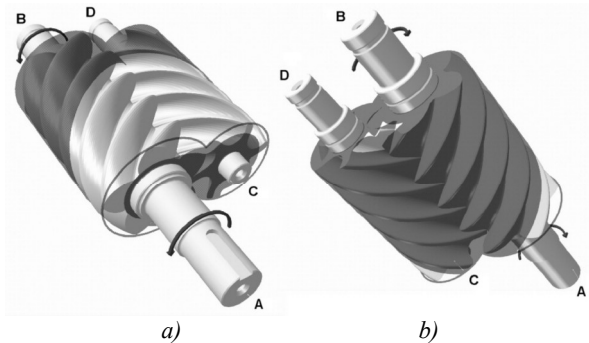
Screw compressor main components (a - view from front and top, b - view from bottom and rear)
